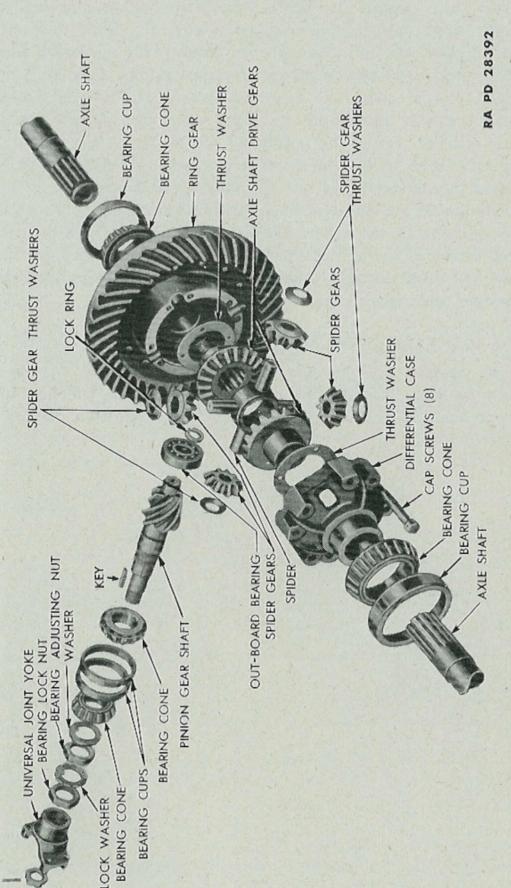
Rear Axle Assembly, Gears, Shafts and Bearings, Disassembled
